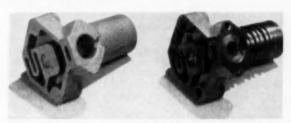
Governor body casting (left) and the same casting machined with a bushing in place (right). The nominal machining stock allowance on these two parts is  $^{1}/_{22}$  in., and in some areas it is even less.
